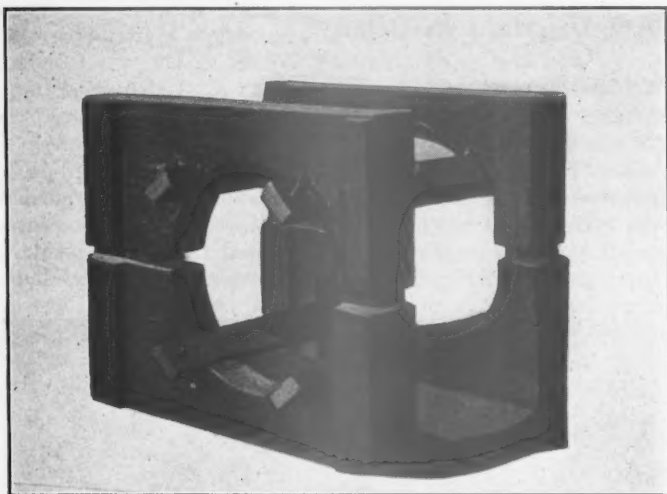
Device for Holding Cylinder Bushings in Lathe While Boring
